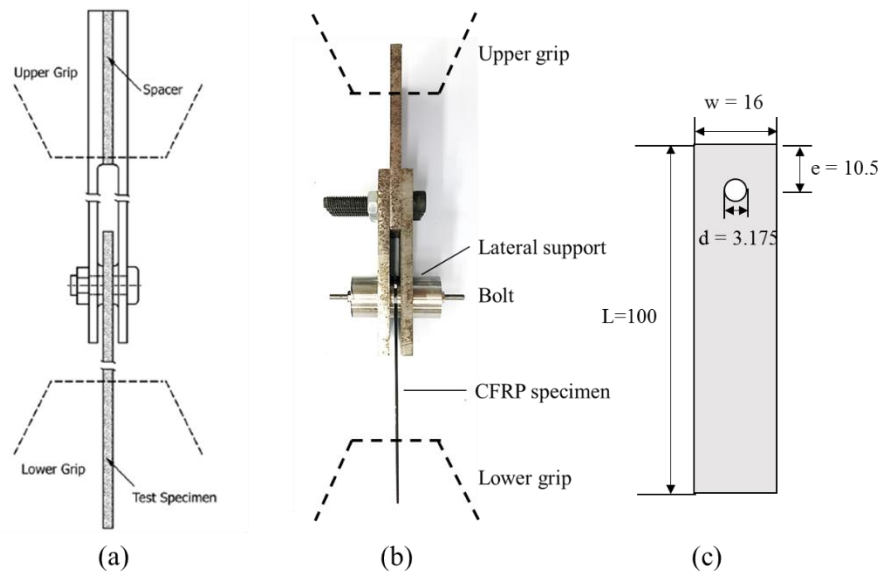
(a) Fixture assembly for a bearing test viewed from the side, (b) fixture assembly viewed from front side and (c) bearing test specimen drawing.
